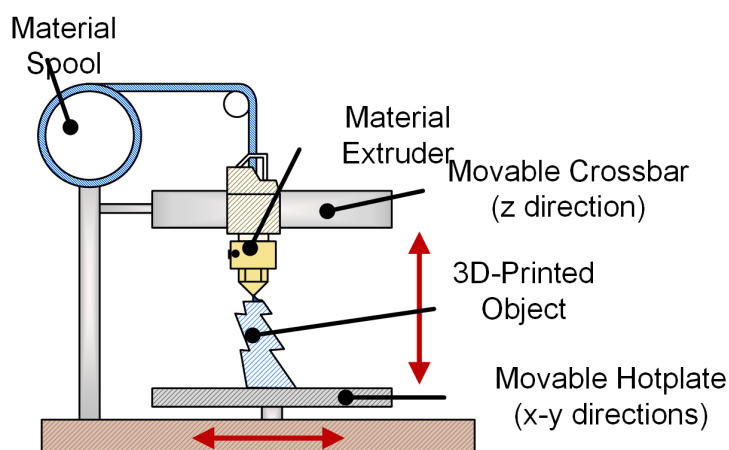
FDM is the simplest of the 3D printing methodologies. In this diagram is possible to observe the most important parts of an FDM printer, namely the extruder, the moving crossbar, the moving hotplate and the material spool.
